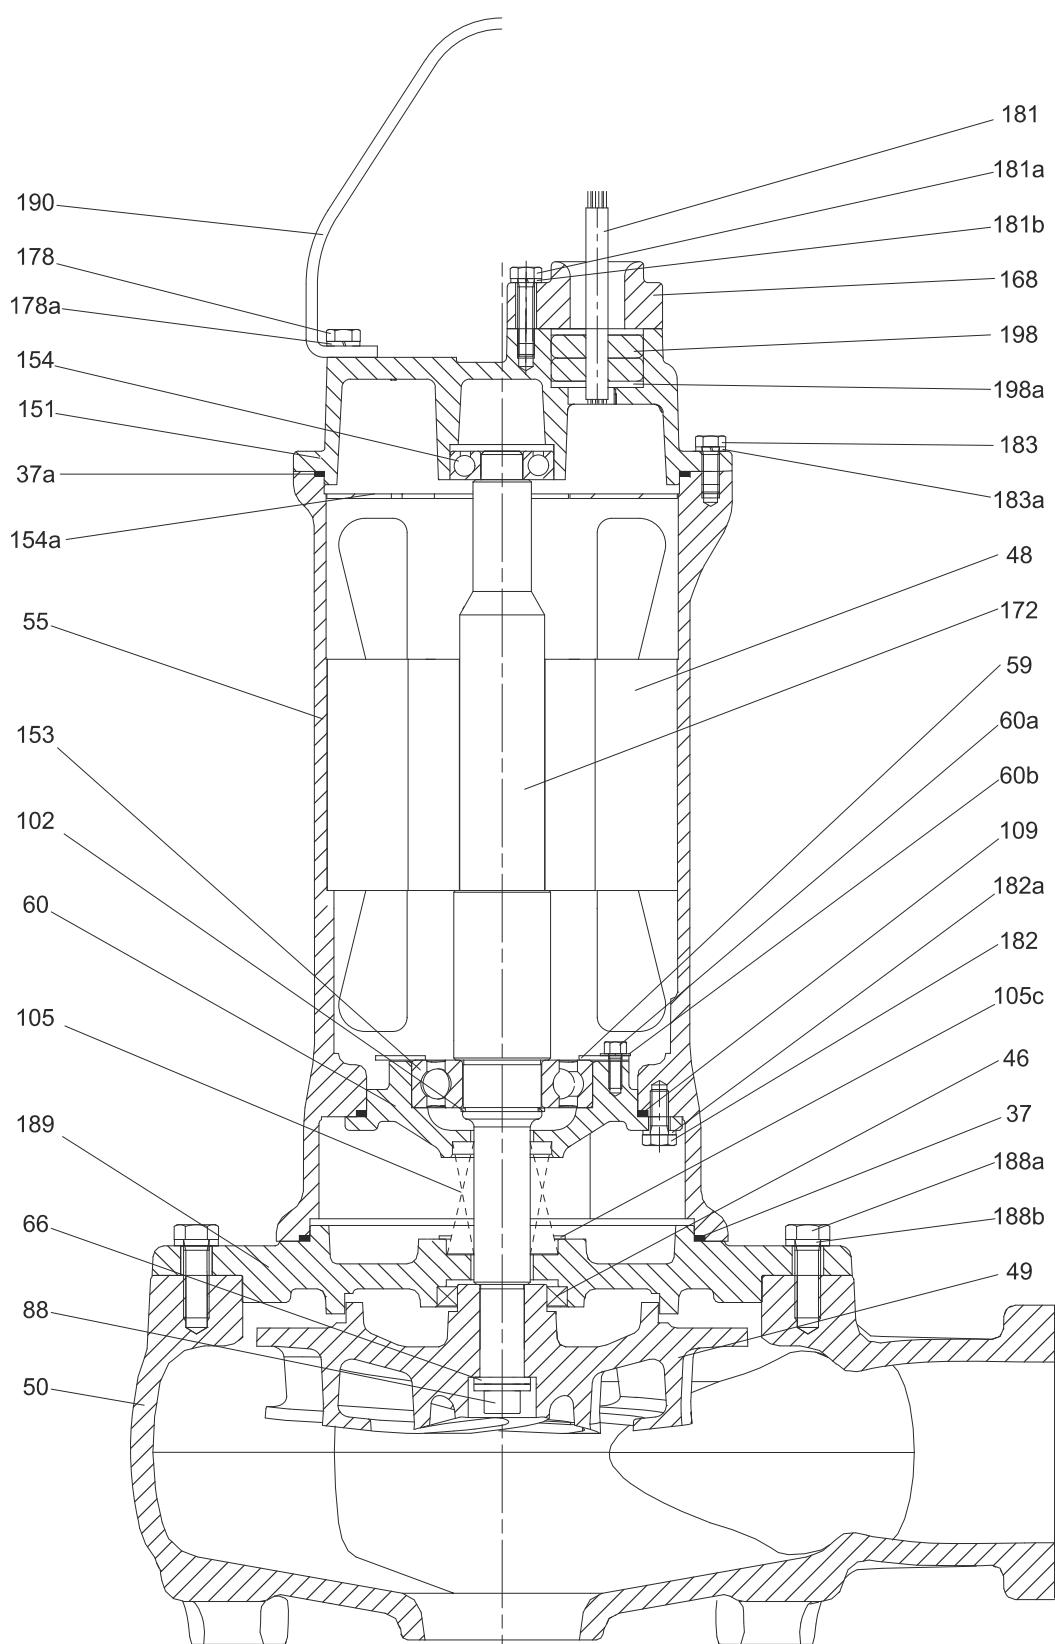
Exploded view DPK.V.65.80.15.4 and DPK.V.65.80.22.4
